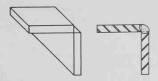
Corner joint. Open corner joints are used when welding heavier plate. A light bead may be added to the inside to give the weld more strength.
